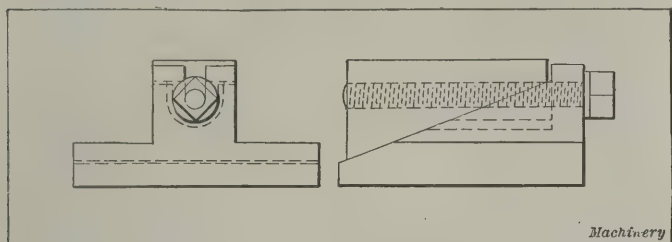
Leveling Block of the Type used in a Concrete Foundation
